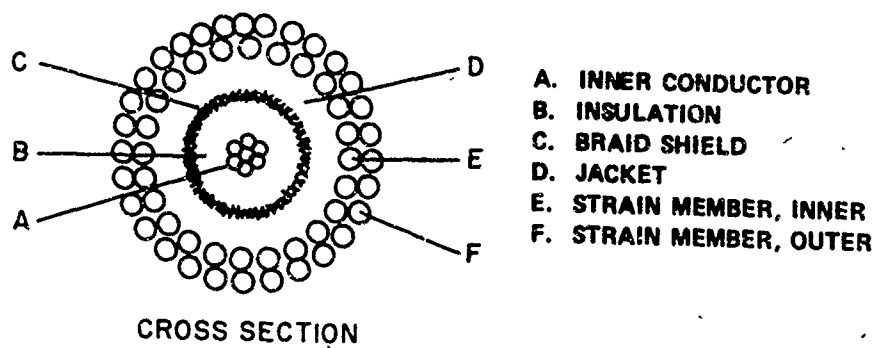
Tow Cable Construction - Cross-Section, Nomenclature
